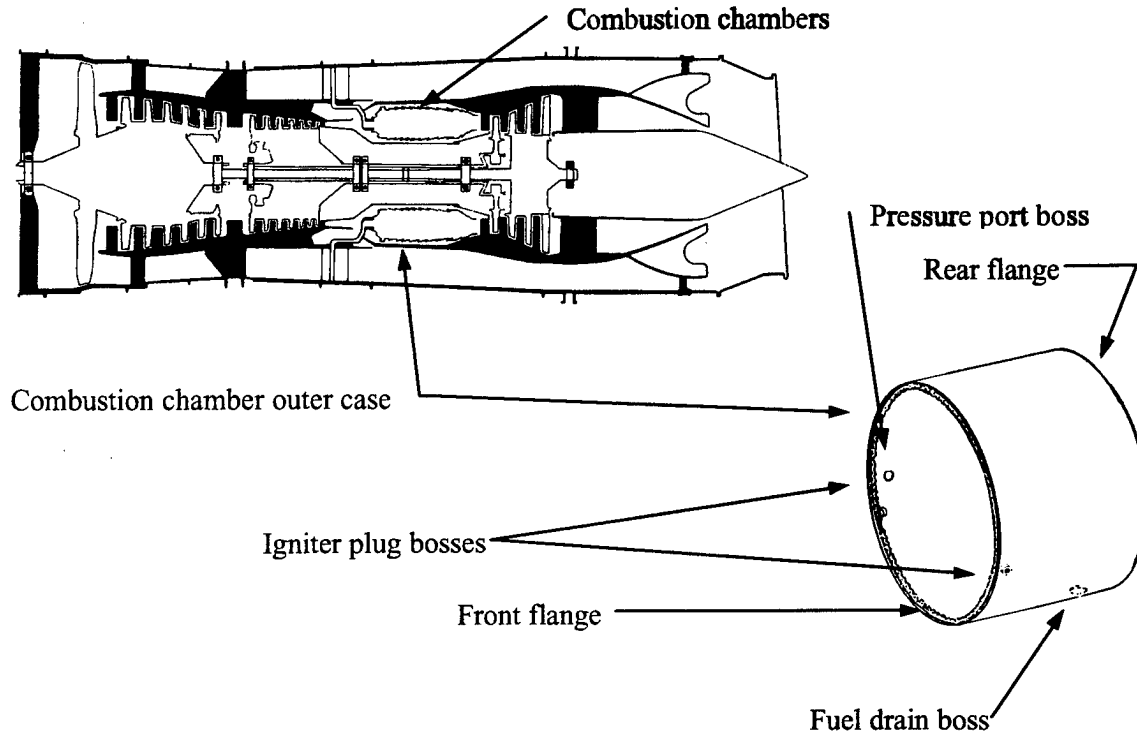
JT8D-200 engine cross section showing the location of the CCOC, and an enlarged view of the CCOC showing the location of the bosses and the case's front and rear flanges.
